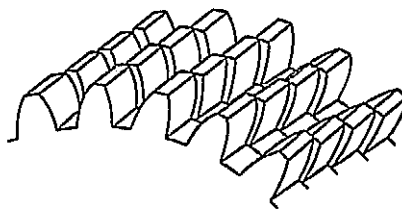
Stepped spur gears. A helical gear results when there is a large number of very thin gear sections.
